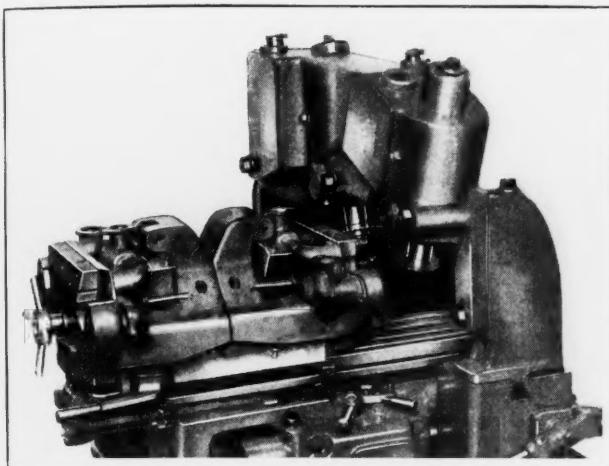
Milling Machine Equipped with Angular Spindles for Cutting Expansion Slots in Automobile Manifolds
